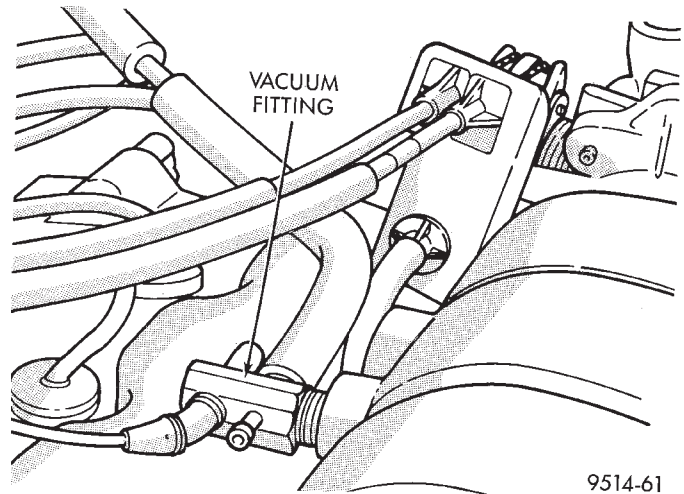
Vacuum Fitting on Rear of Intake Manifold
